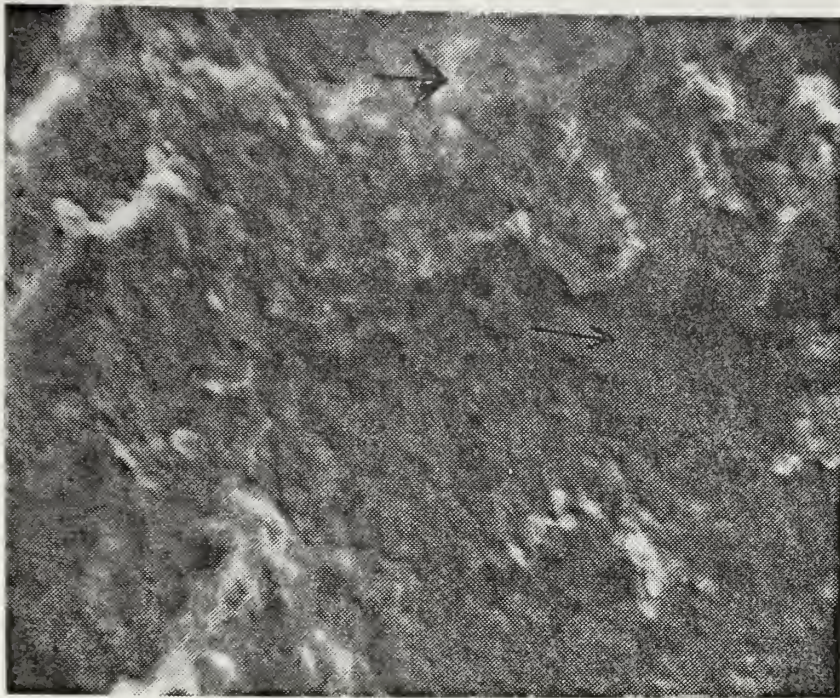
Area outlined by the rectangle in fractograph of Fig. 31. Shown at higher magnification are the fatigue striation shape, secondary cracks and cleavage facets (such as at arrows). X2400.
